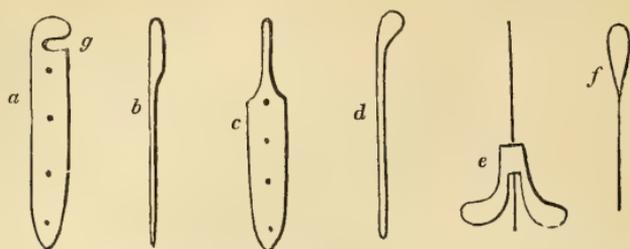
Details of Wire Fastenings for keeping Mats on Frames; one sixth of the full size.
